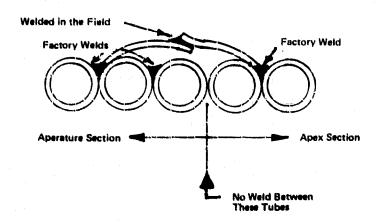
Concept for Joining the Apex Section To the Aperture Section In the Field
